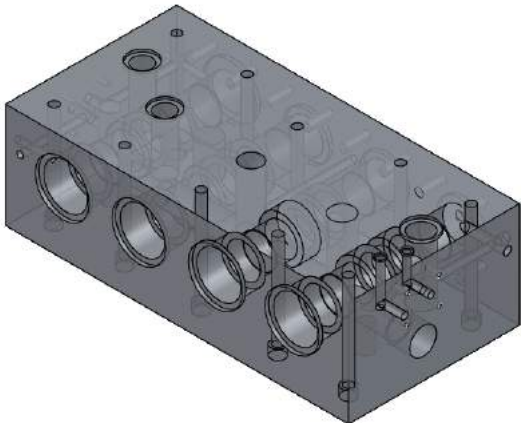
Solid model of the body of the hydraulic control valve for the hydraulic shearing machine
